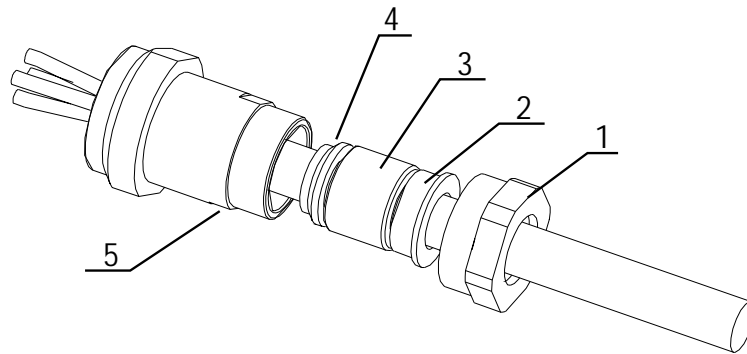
Assembling a Power Cable Connector (step 2)
